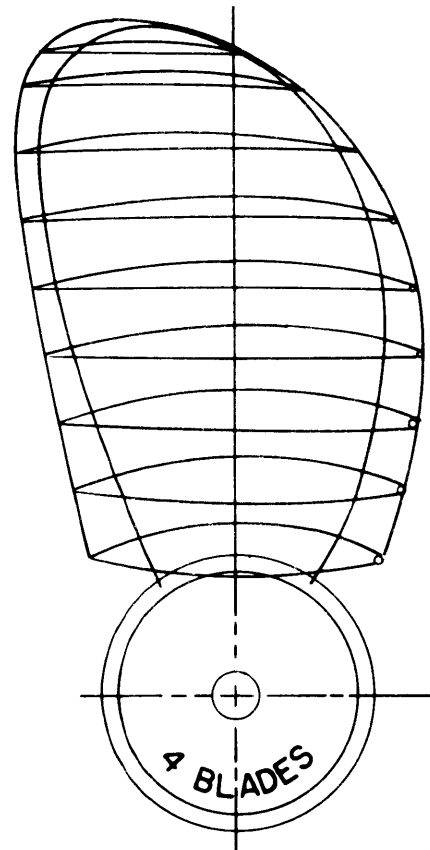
(c) - Drawing of the Wake-Adapted Skewed Propeller
